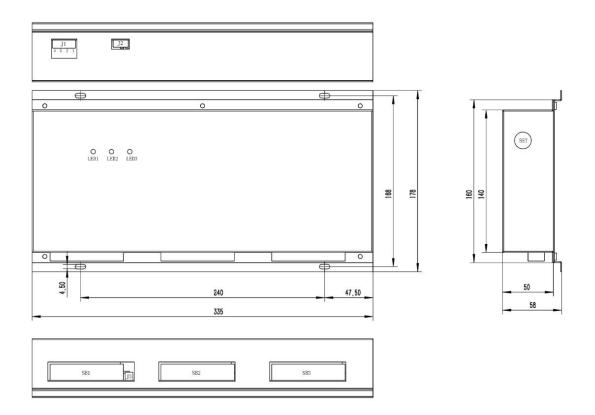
Dimensional drawing of steel strip monitoring device product (unit: mm)
